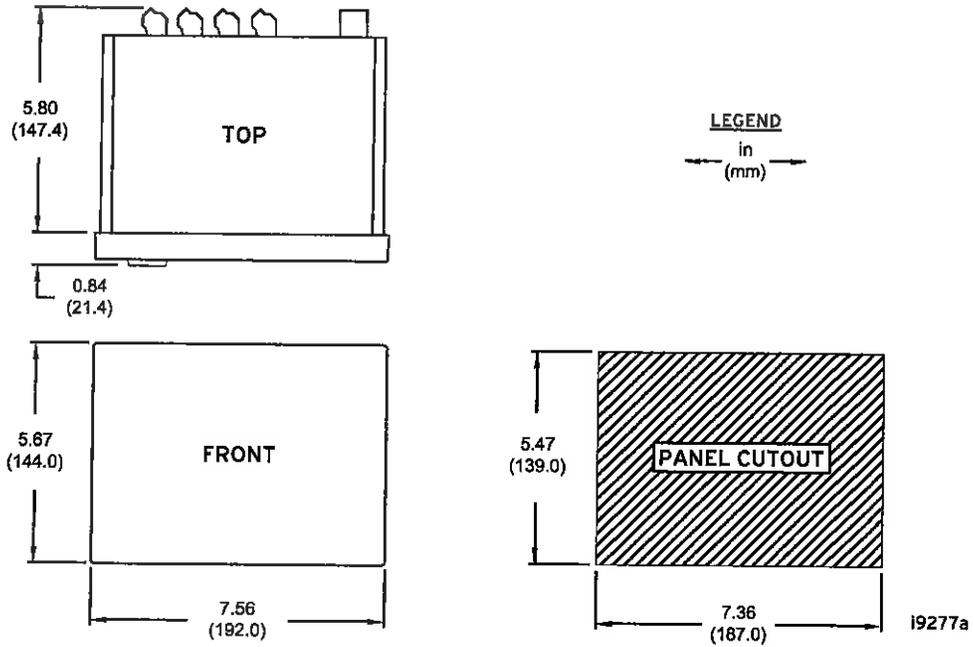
SEL-735 Horizontal Panel-Mount Dimensions
